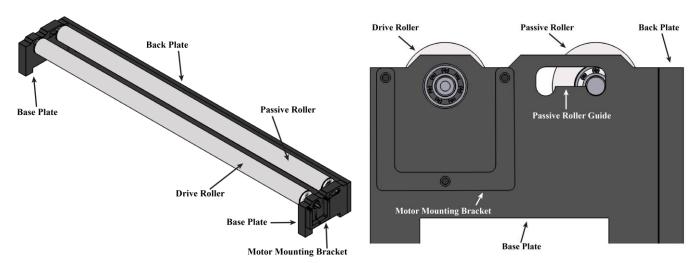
CAD generated images of the scanner assembly base without camera, motors or camera drive mechanism (Oblique View – Left, Drive Side View – Right). The rollers are 36 inches long having an outer diameter of 1.75 inches. The passive roller guide allows the roller spacing to be reduced for smaller core diameters. The rollers will be coated with a solid color not common in core to improve edge detection in the analysis software.
